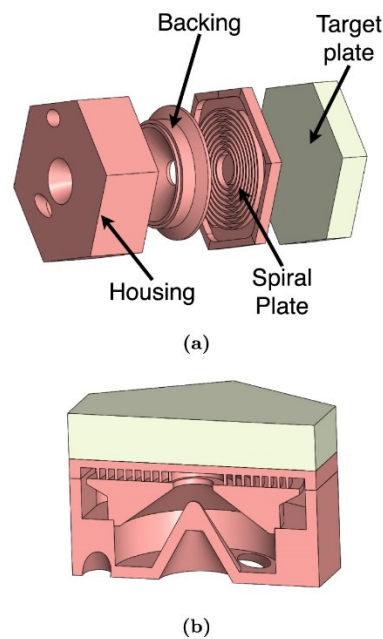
Schwartz's Spiral Plate Module. (a) assembly view, (b) cross-sectional view [11]
